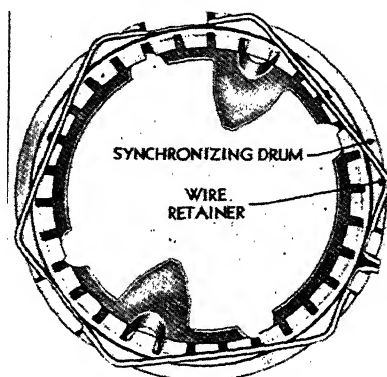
Synchronizing Drum and Gear Retaining Wires
